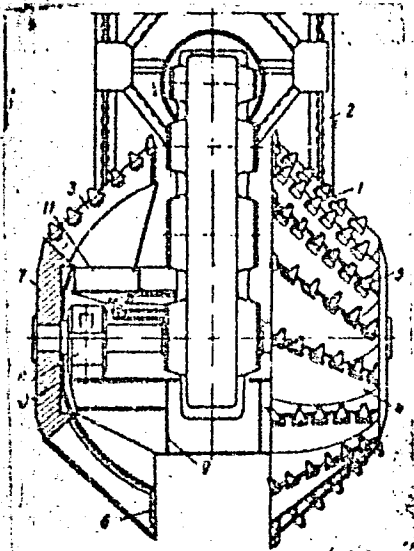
1- rotary working unit; 2- box; 3- conical rotors; 4- lug-mounted convex cutter; 5- armored teeth; 6- ring; 7- hub; 8- protruding roller of the anchor drive reducer; 9- bearing beam; 10- spherical shell; 11- ring feeder with a drive mechanism
